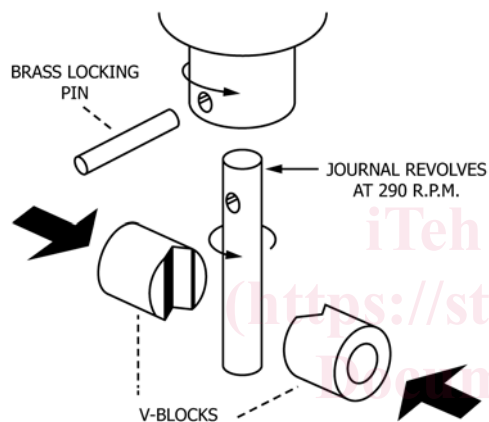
Exploded View of V-Blocks and Journal Arrangement, Falex Pin and Vee Block Test Machines
